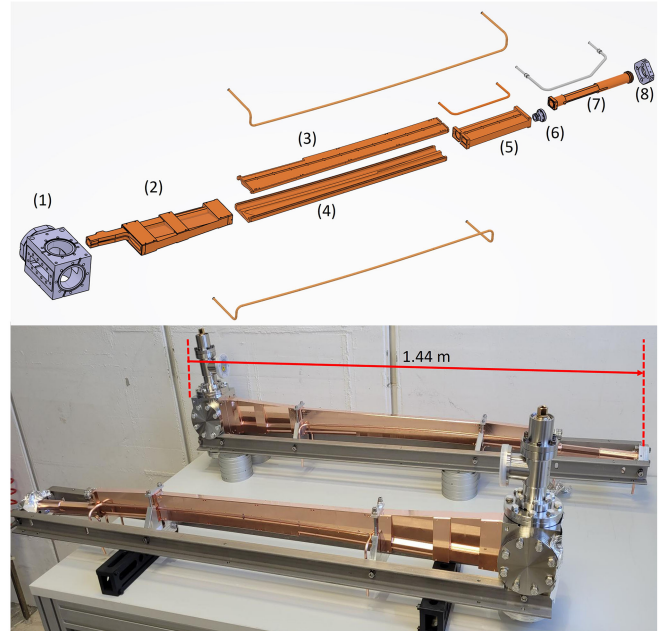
Exploded view of the dipole chamber CBN (top) and pictures of two units installed in their transport stiffeners (bottom).
